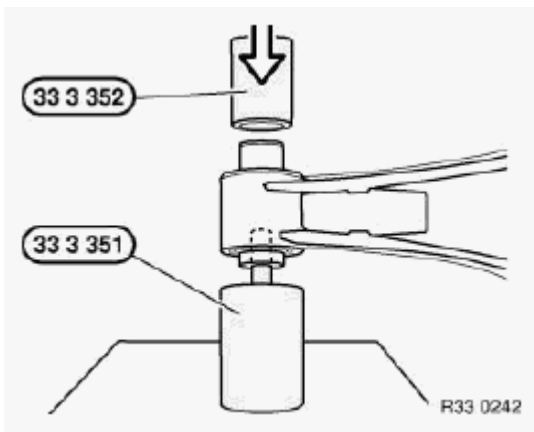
Special Tool (33 3 352) And (33 3 351)
